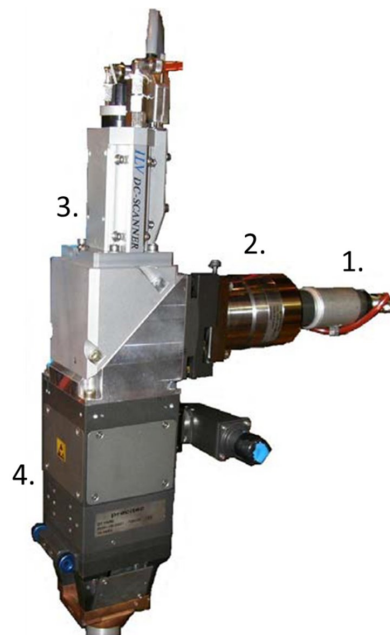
Precitec YW50 welding head and ILV DC scanner, 1. Fiber coupling, 2. Collimator, 3. Scanner and 4. Precitec welding head housing and focusing optics [89]
